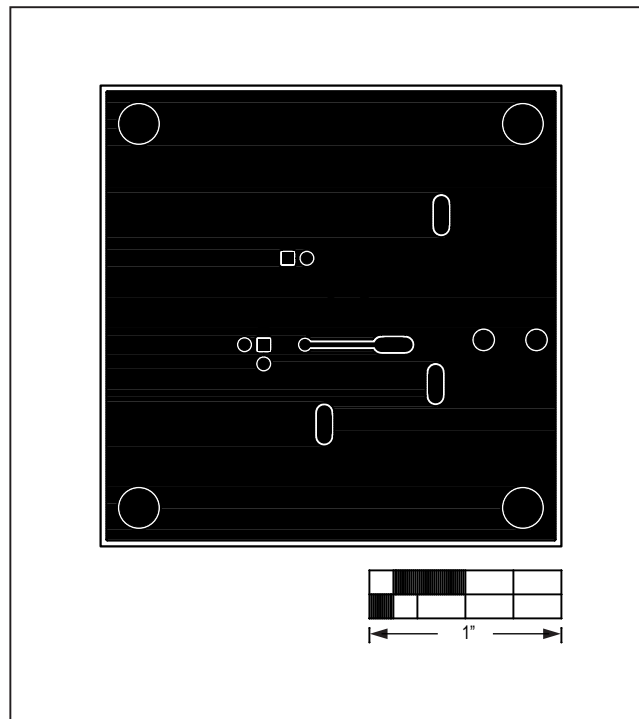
MAX9716 EV Kit PC Board Layout—Solder Side
